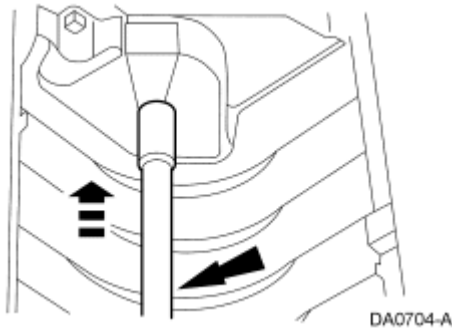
Sliding Coolant Tube Forward With O-Ring Seals Into Cylinder Block
